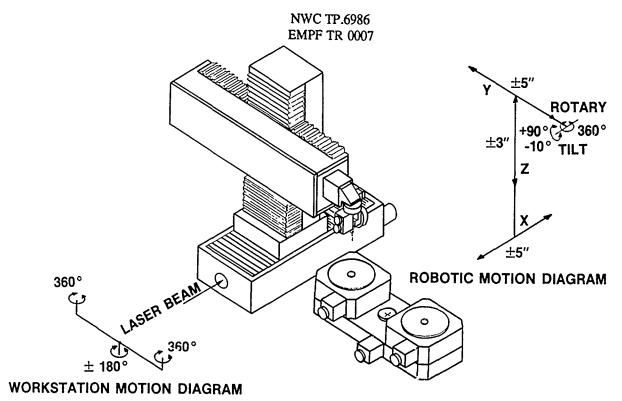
Dual Rotary Work Platforms Accommodate Parts for Soldering and Trimming.
